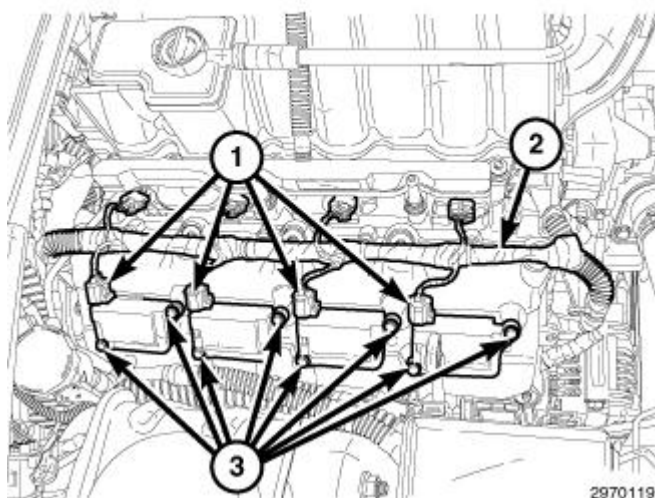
Ignition Coil Electrical Connectors, Harness & Bolts
